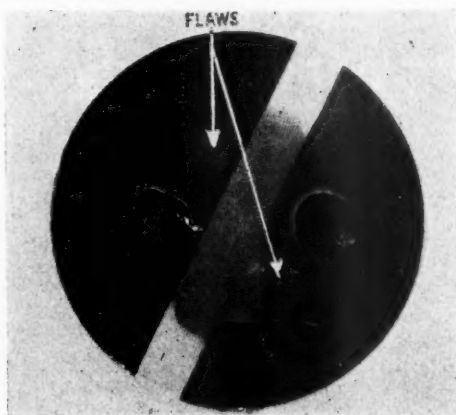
X-RAY PHOTOGRAPH OF MOULDING WITH INTERNAL FLAWS.
